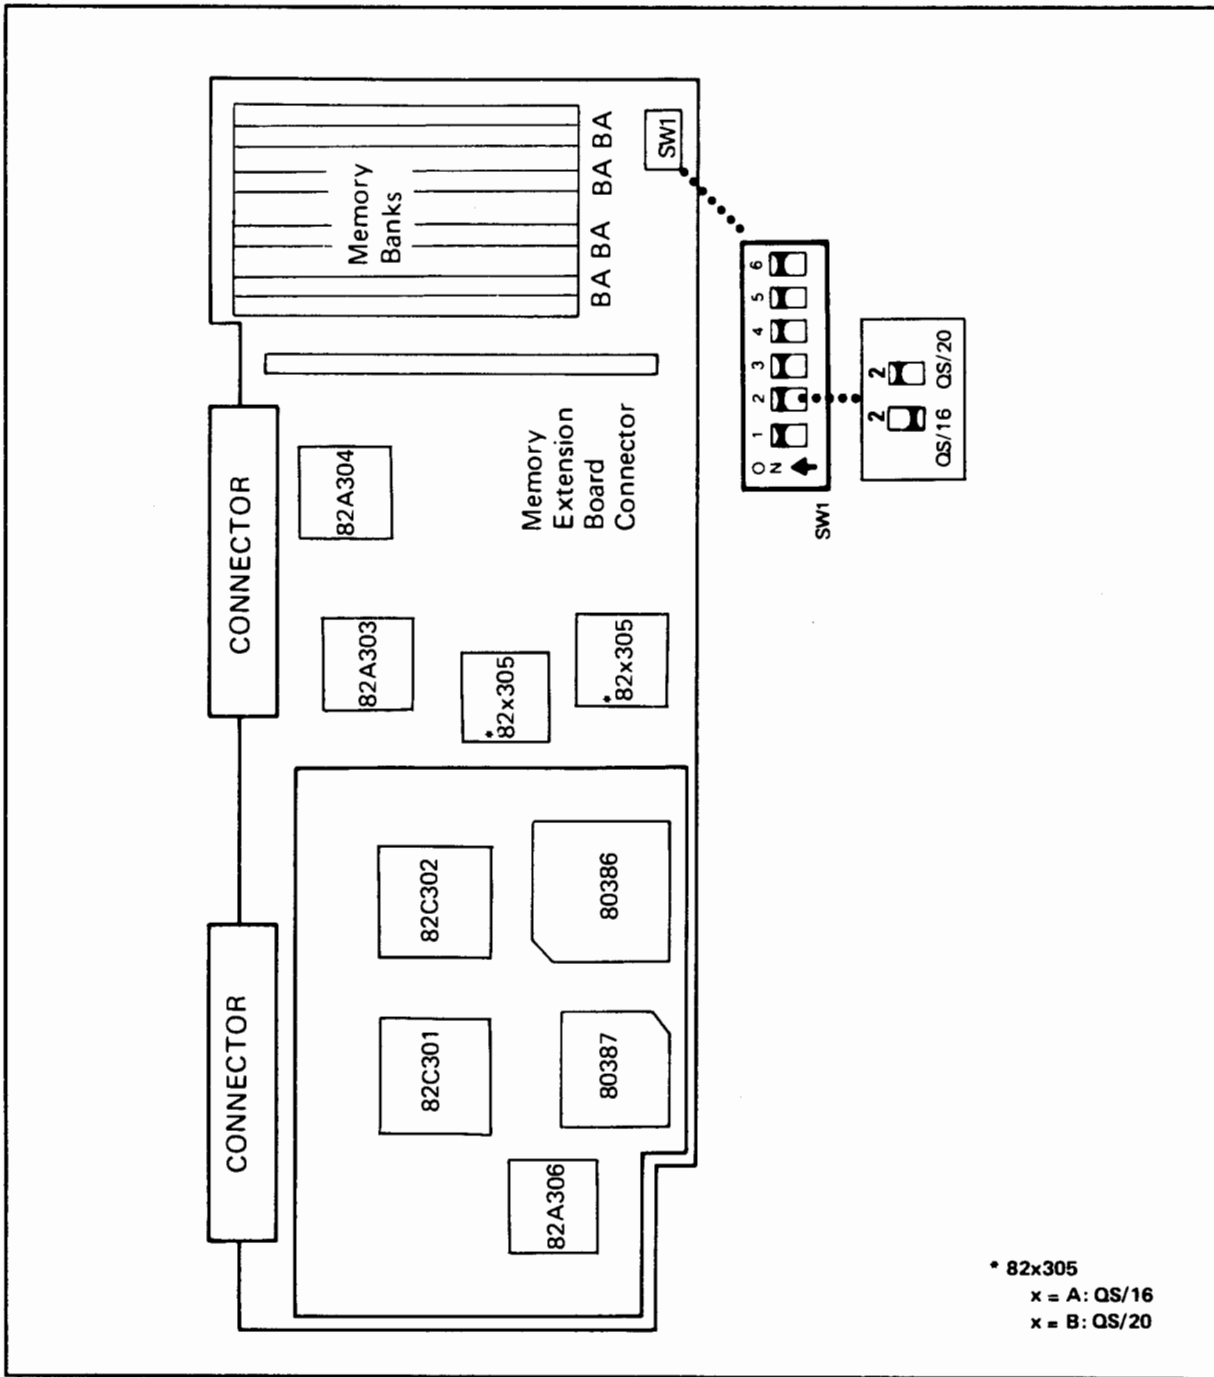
QS/16 & QS/20 Processor/Memory PCA Component Layout
